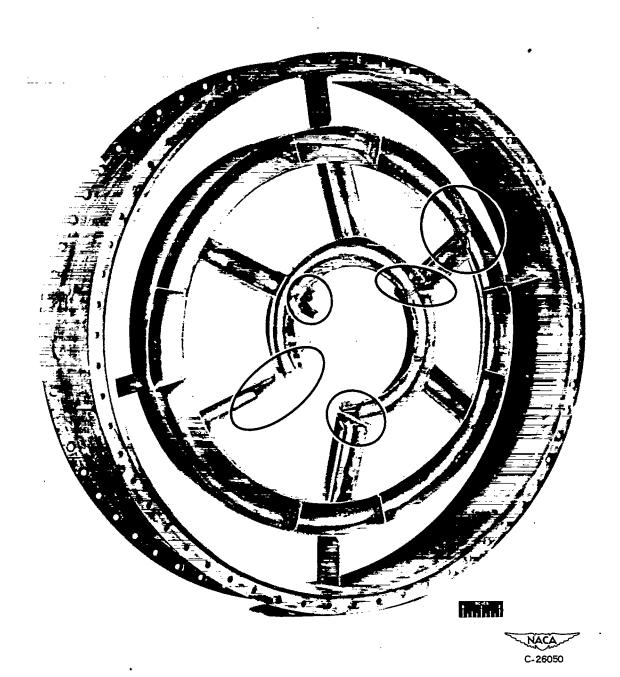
Typical V-gutter failure at gutter intersections and in sheltered region.
